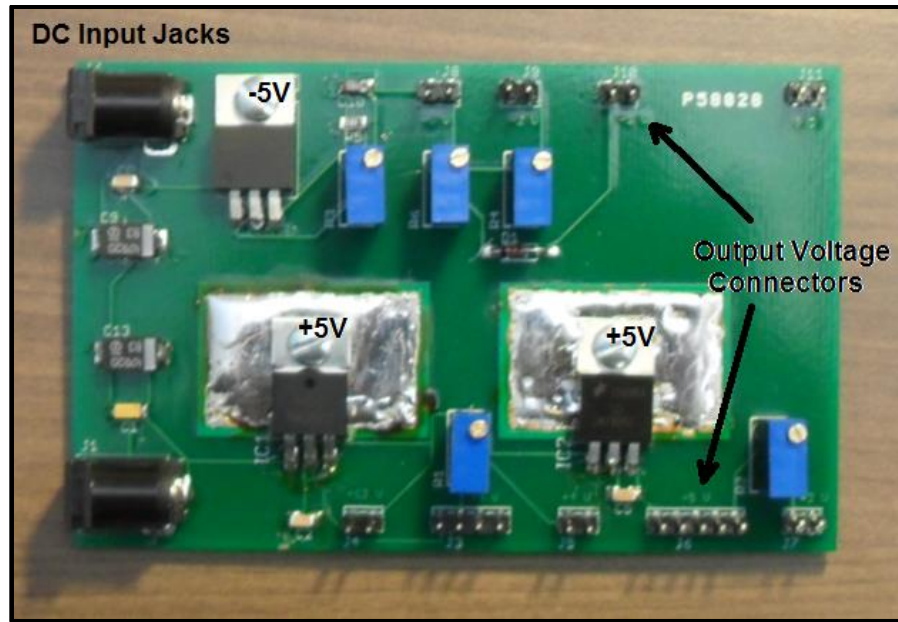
STW Power Supply. Final dimensions are 2.5" x 3.5"
